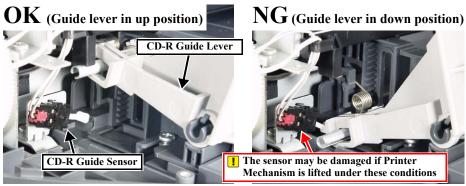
CD-R Guide Lever and CD-R Guide Sensor
